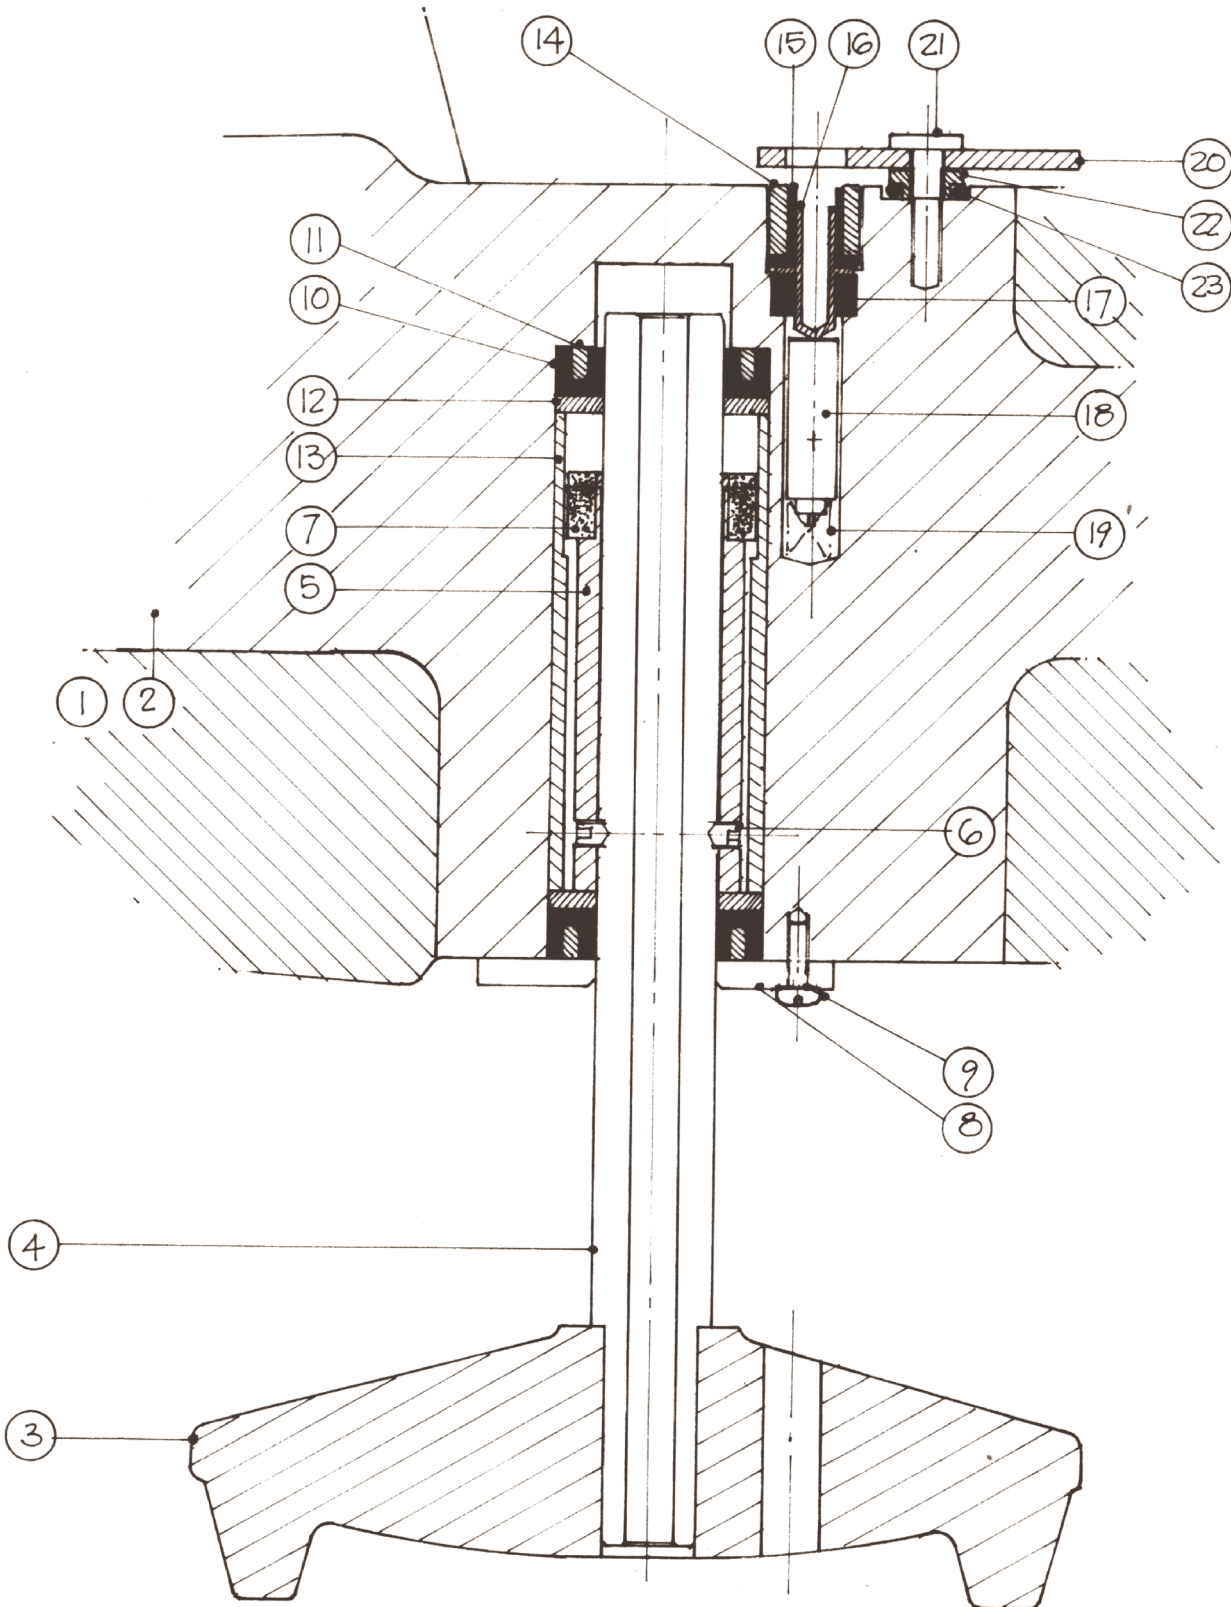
PLUNGER AND REED SWITCH ASSEMBLY (GFN50-A1)
